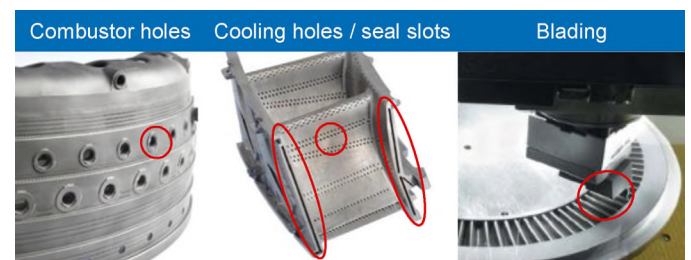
Sinking-EDM sample turbomachinery features indicated in red (courtesy of Winbro Group, MTU Aero Engines, GF Machine Solutions).
